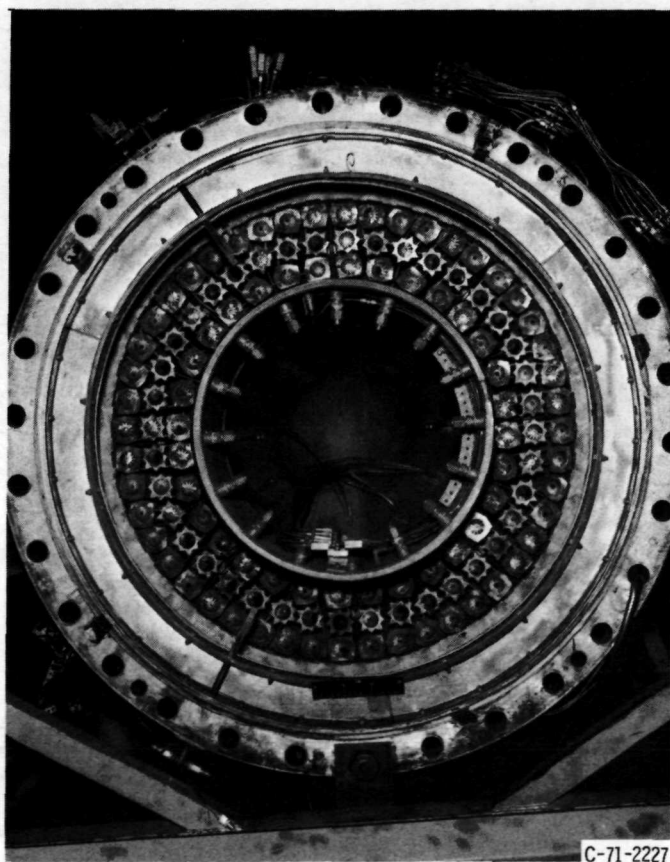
Combustor with inside-diameter liner removed to better illustrate module array. View is upstream into the combustor.
